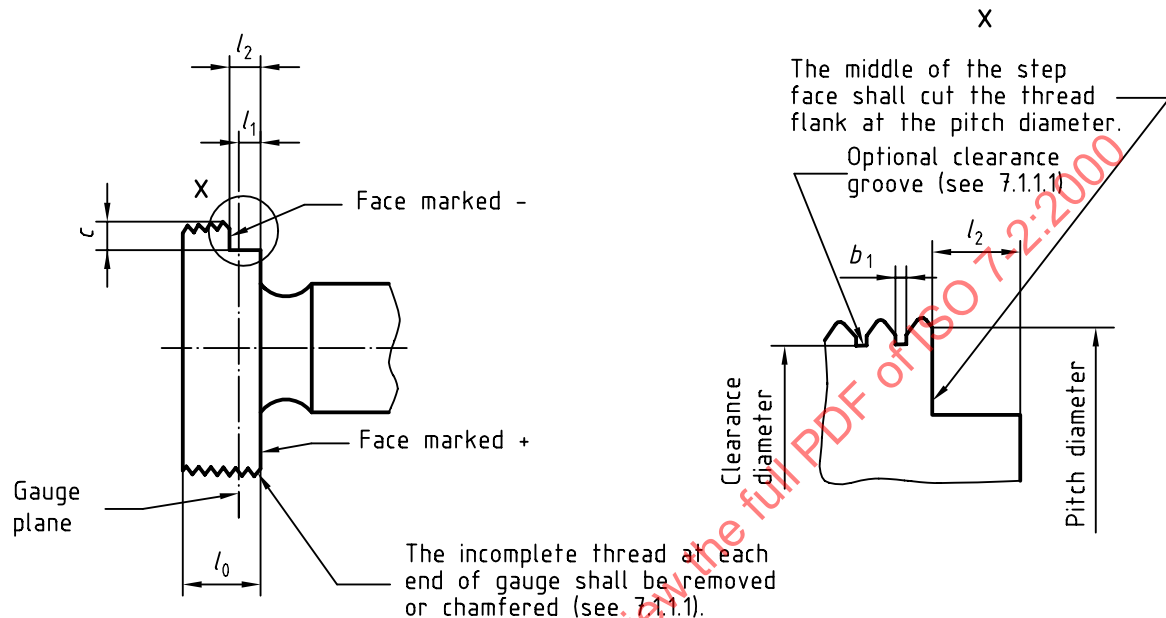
Taper full form threaded plug gauge (gauge No. 1)
